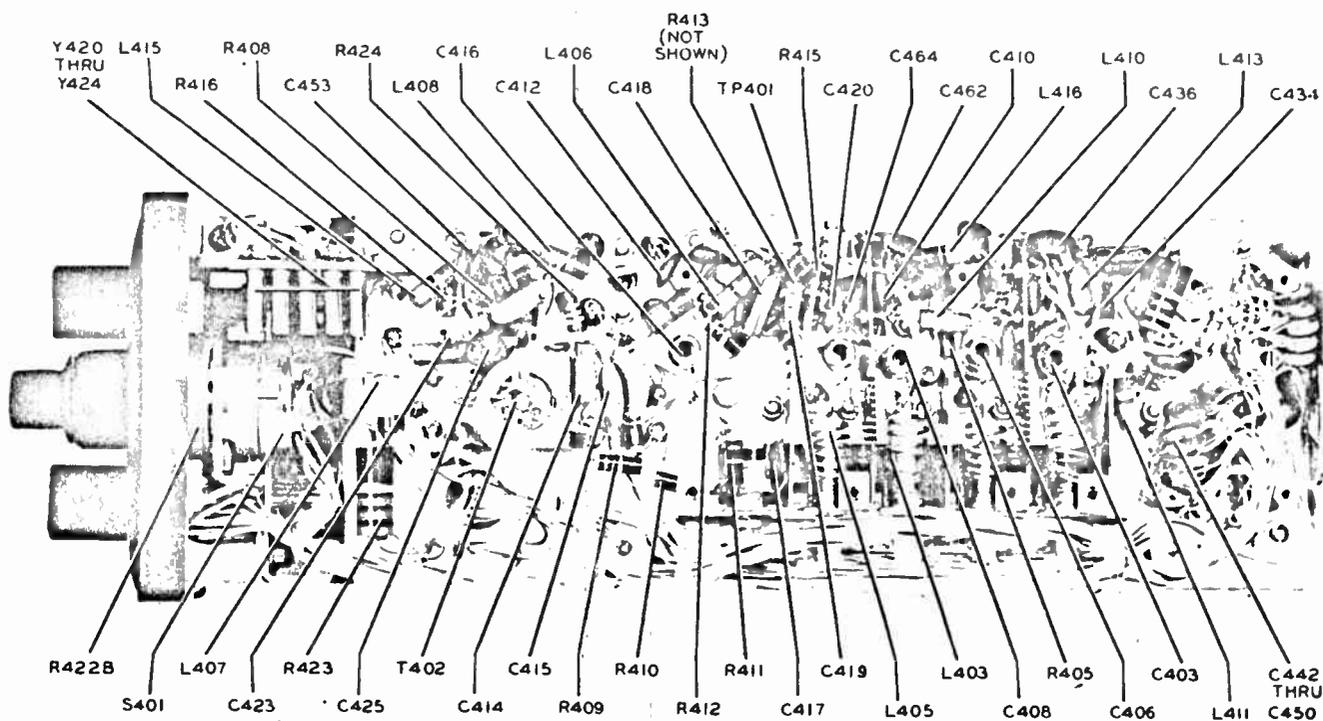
B. Receiver 51X-3, Bottom View, Dust Cover and R-F Shield Removed
